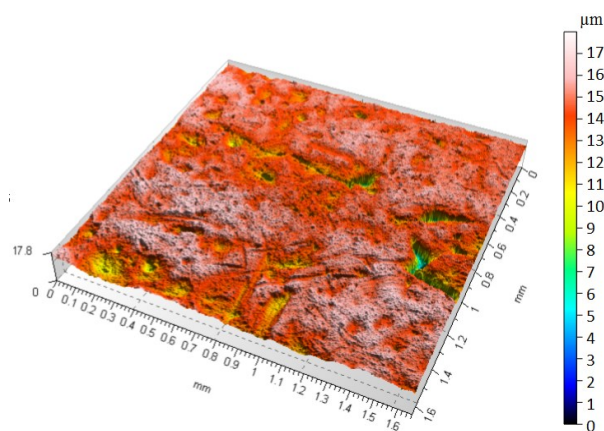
3D optical surfaces of the casting after vibro-abrasive grinding on 180 min., *Sa* = 0.85 µm
